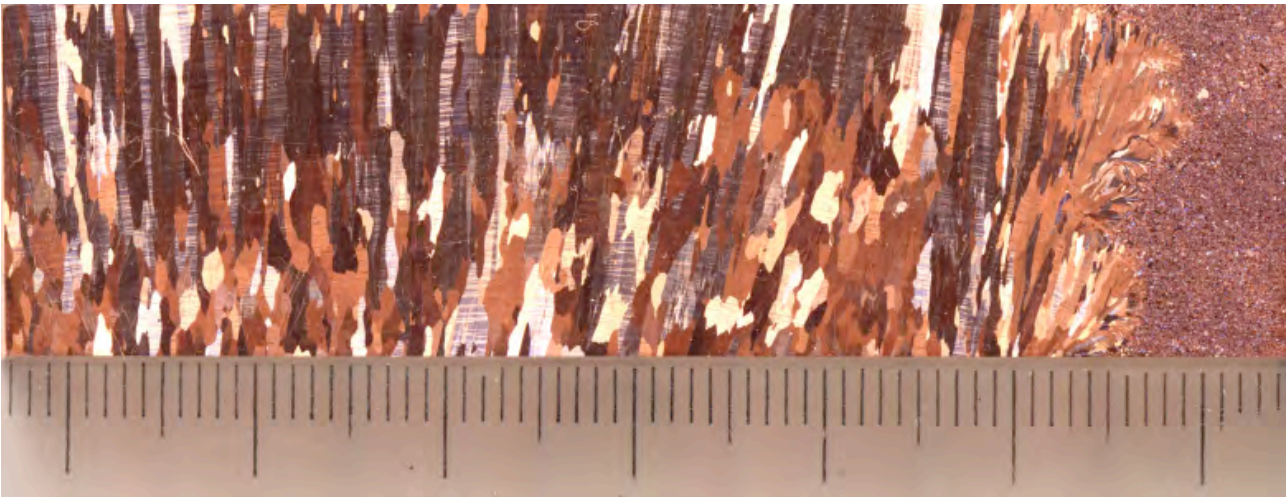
Macrograph of the longitudinal section of an EB weld. Top of the weld is on the left side and bottom on the right side. Tube material can be seen on the right side. The very large longitudinal grain size of the weld can be clearly seen.
